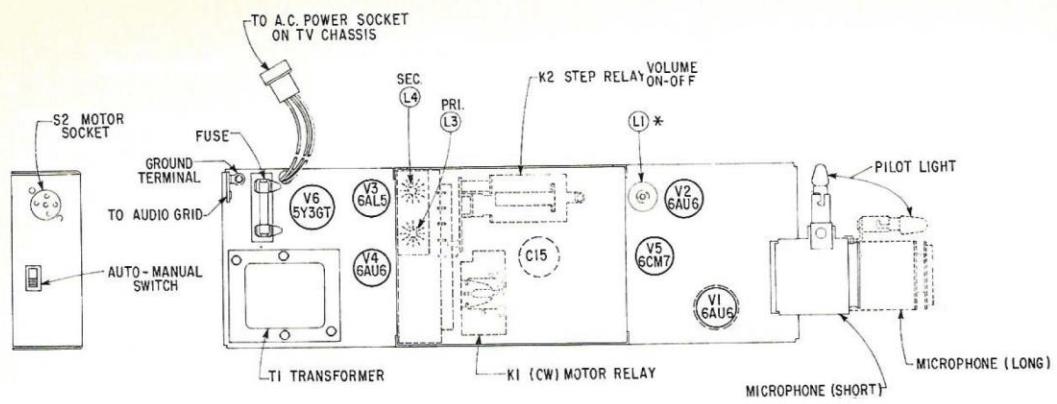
Tube and Trimmer Layout S-48573 Space Command Control Chassis
